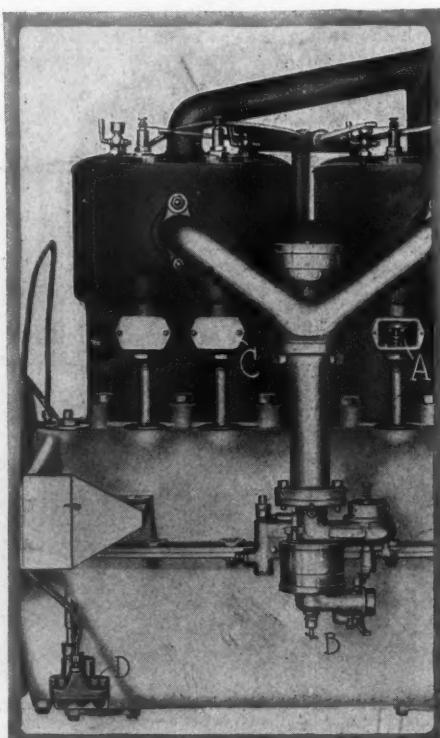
VIEW OF RIGHT SIDE OF MOTOR SHOWING VALVE LIFTER COVERED AT C AND OPEN FOR ADJUSTMENTS AT A
